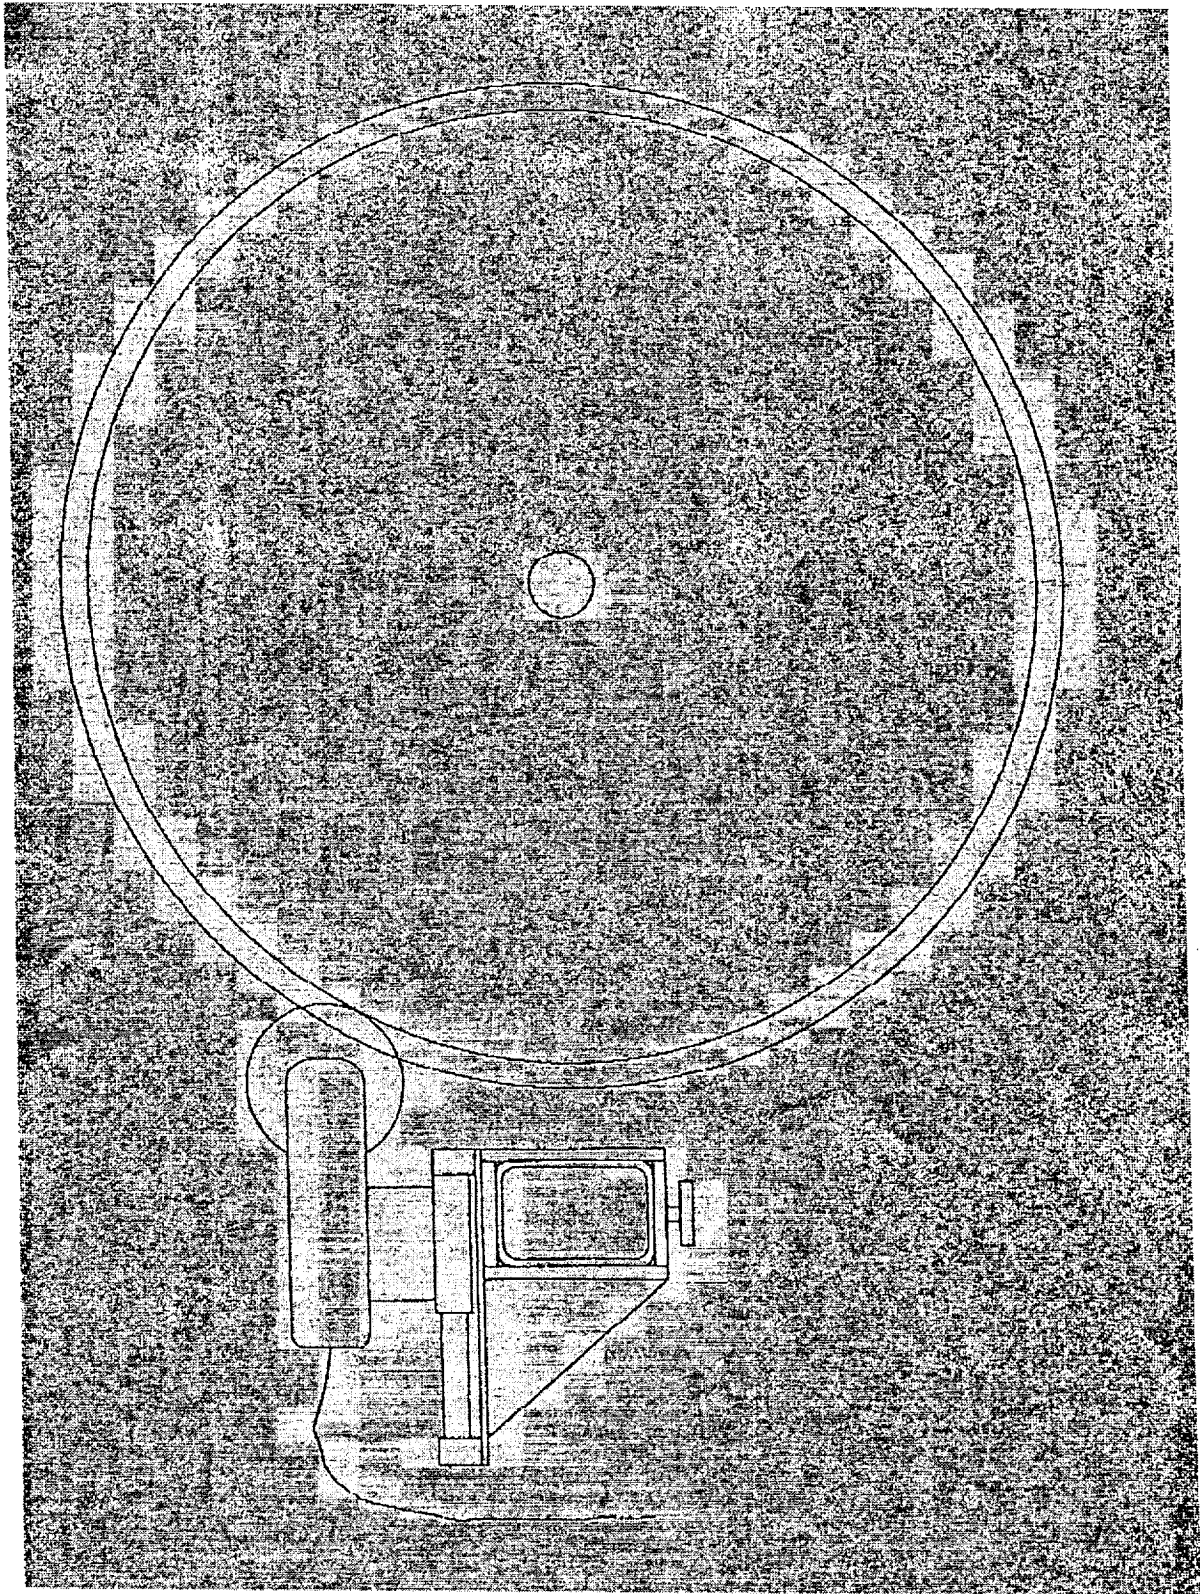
THE DIAMOND CUTTER ASSEMBLY
